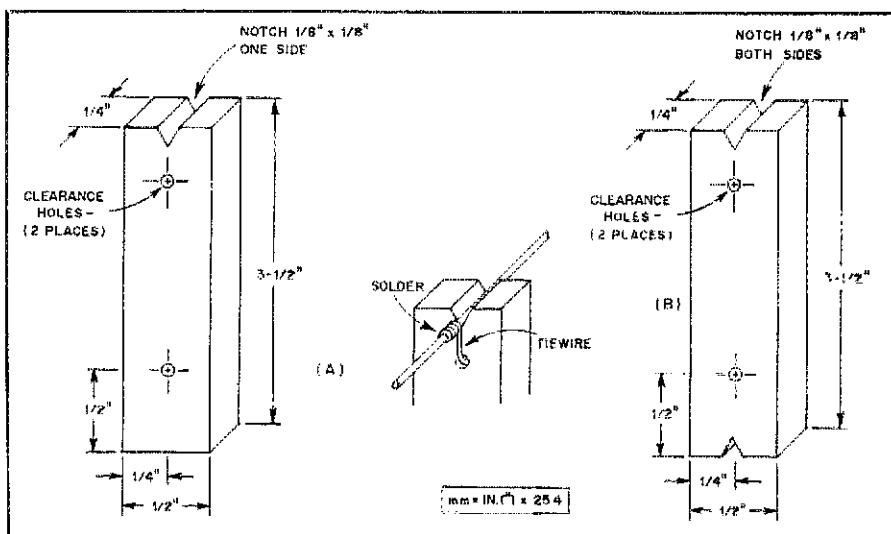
Spacer construction details for antenna sections are shown at A. Details of a spacer used for constructing the open-wire line are shown at B.
